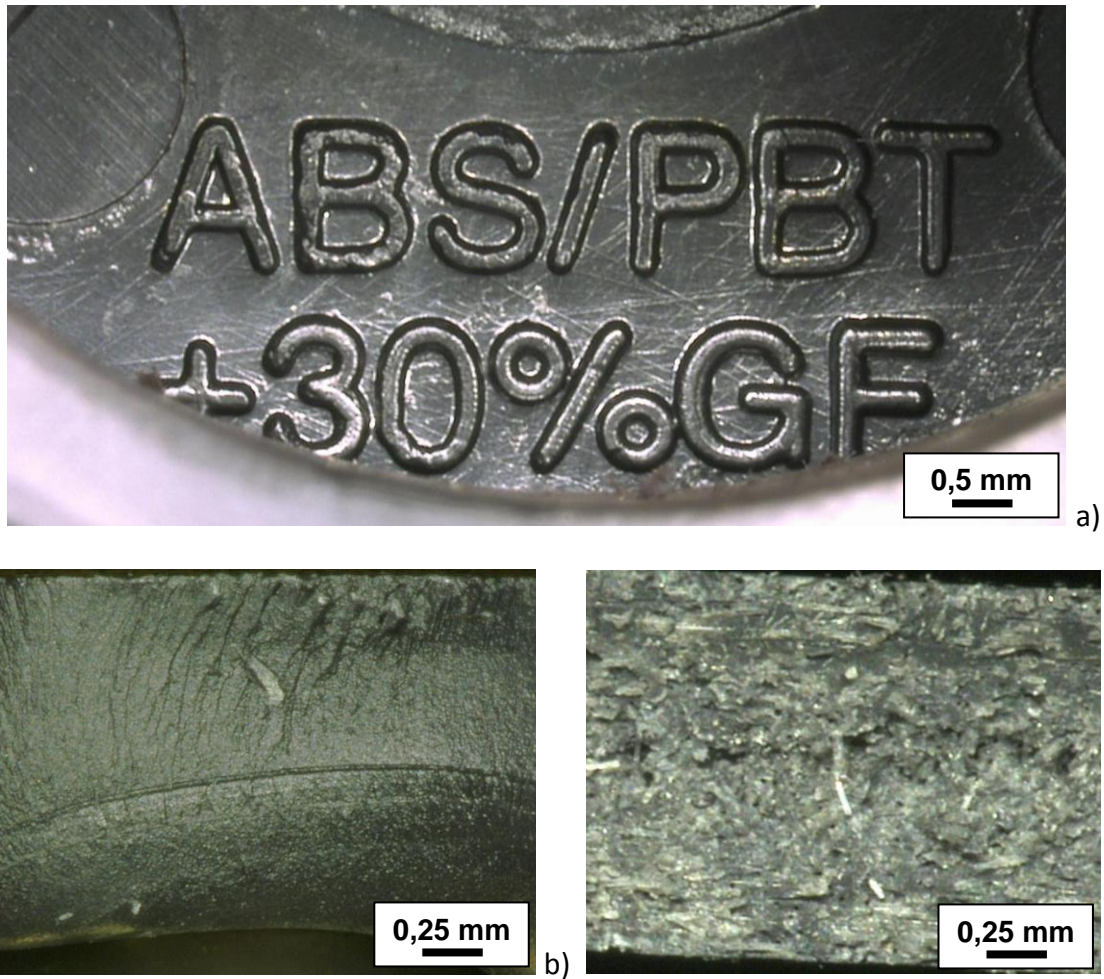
Example for material mistaken identity, a) relief of material identity on component, b) fracture surface of component shown in a), c) fracture surface of a component made from ABS/PBT + 30 % GF
